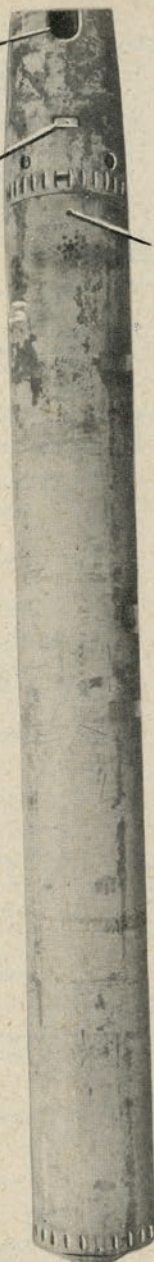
Torpedo Eighth Year Type Mark 2 Mod 2, Flask Section, Top View
